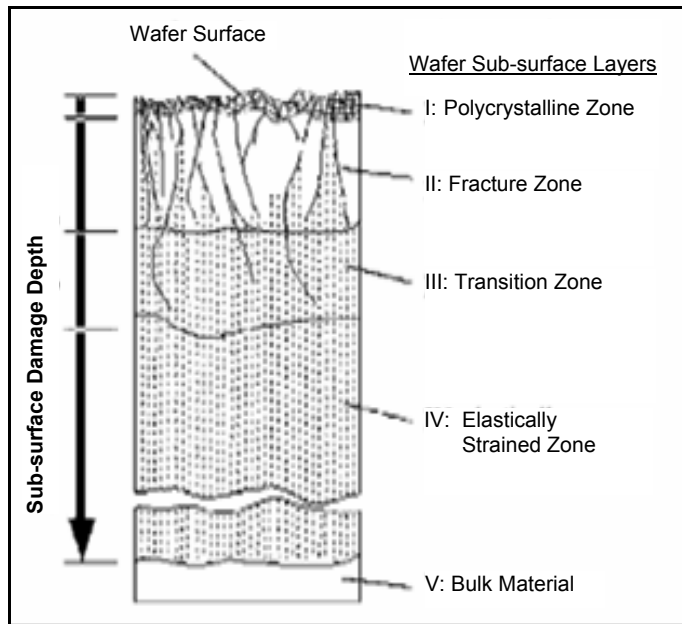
Schematic view of the induced SSD by mechanical grinding [69]
